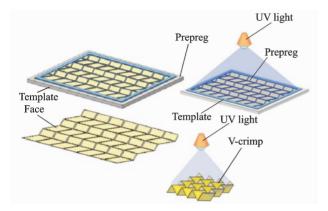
Scheme of V-crimp manufacturing using UV curing and template
